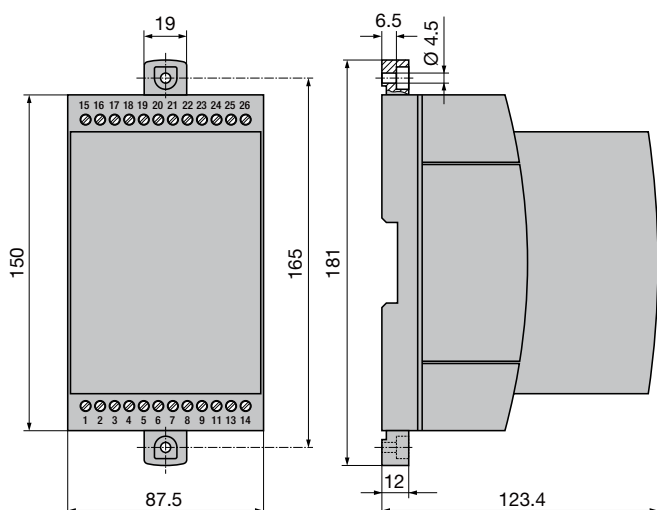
SINEAX DME 400 in housing T24, screw hole mounting brackets pulled out.
